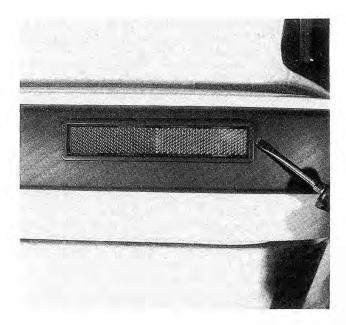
Side marker lens being removed. Use screwdriver to pry at front of housing.
